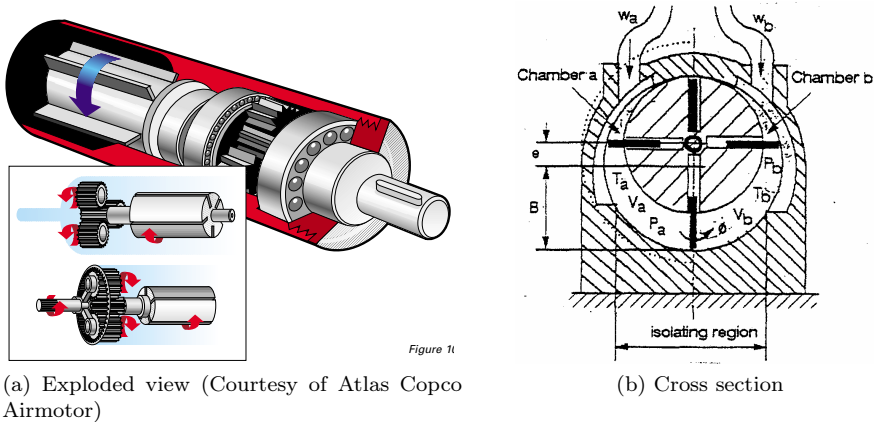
Exploded view and cross-section of a low power vane air motor
